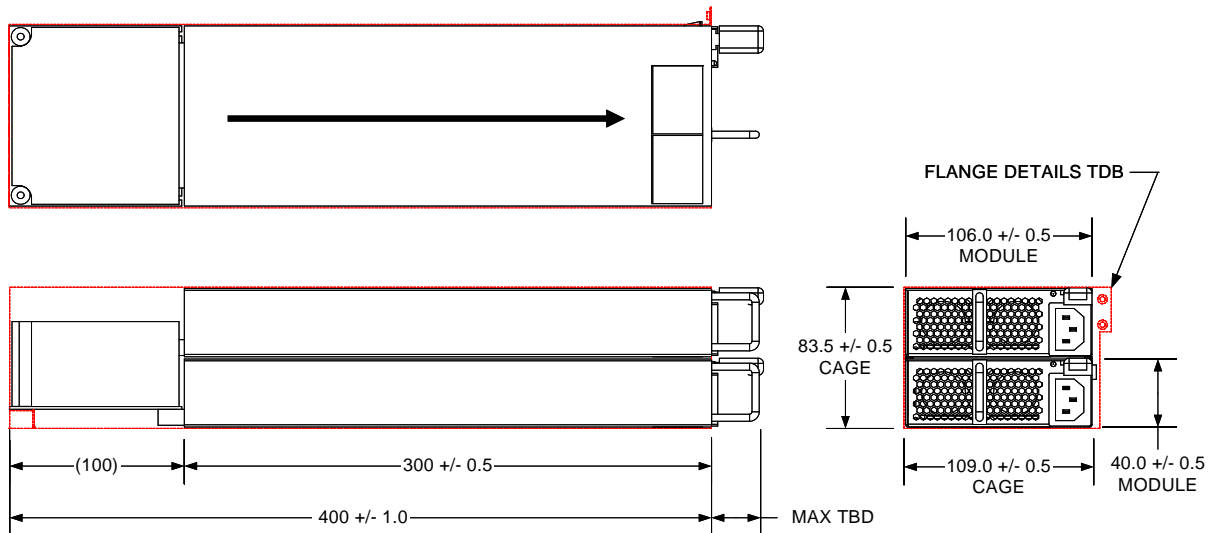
Mechanical Drawing for Dual (1+1 configuration) Power Supply Enclosure with PDM
